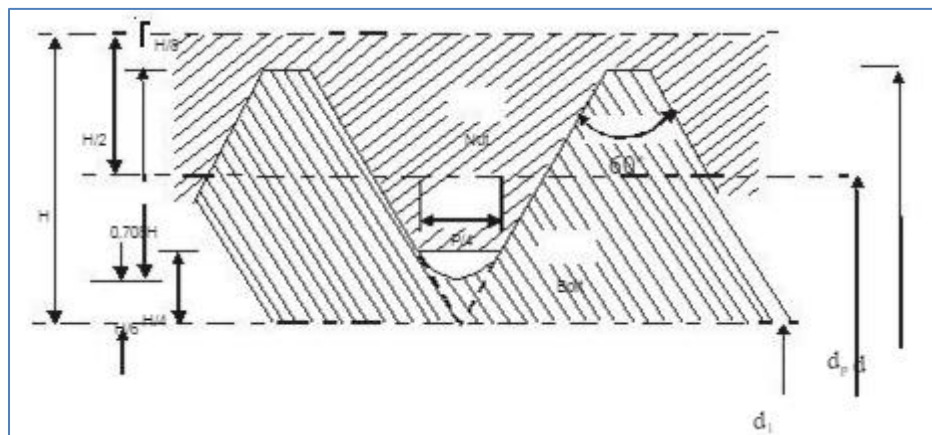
Profiles of Fastener Threads on Screw (Bolt) and Nut
